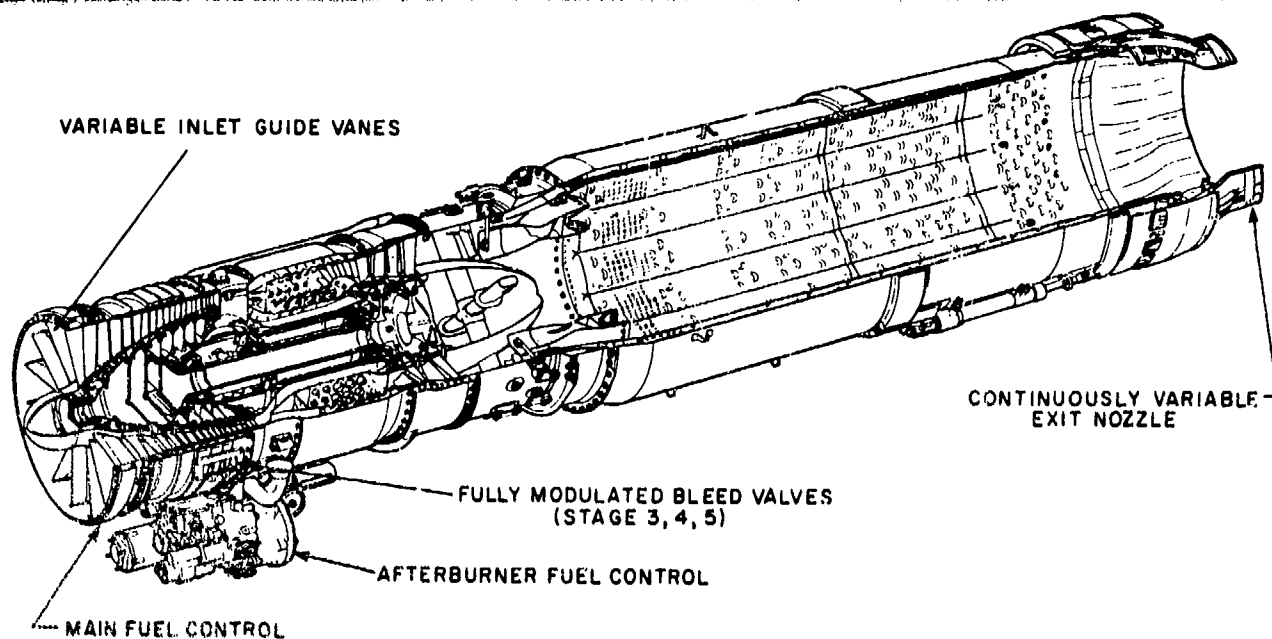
J85-CAN-15 CUTAWAY VIEW
